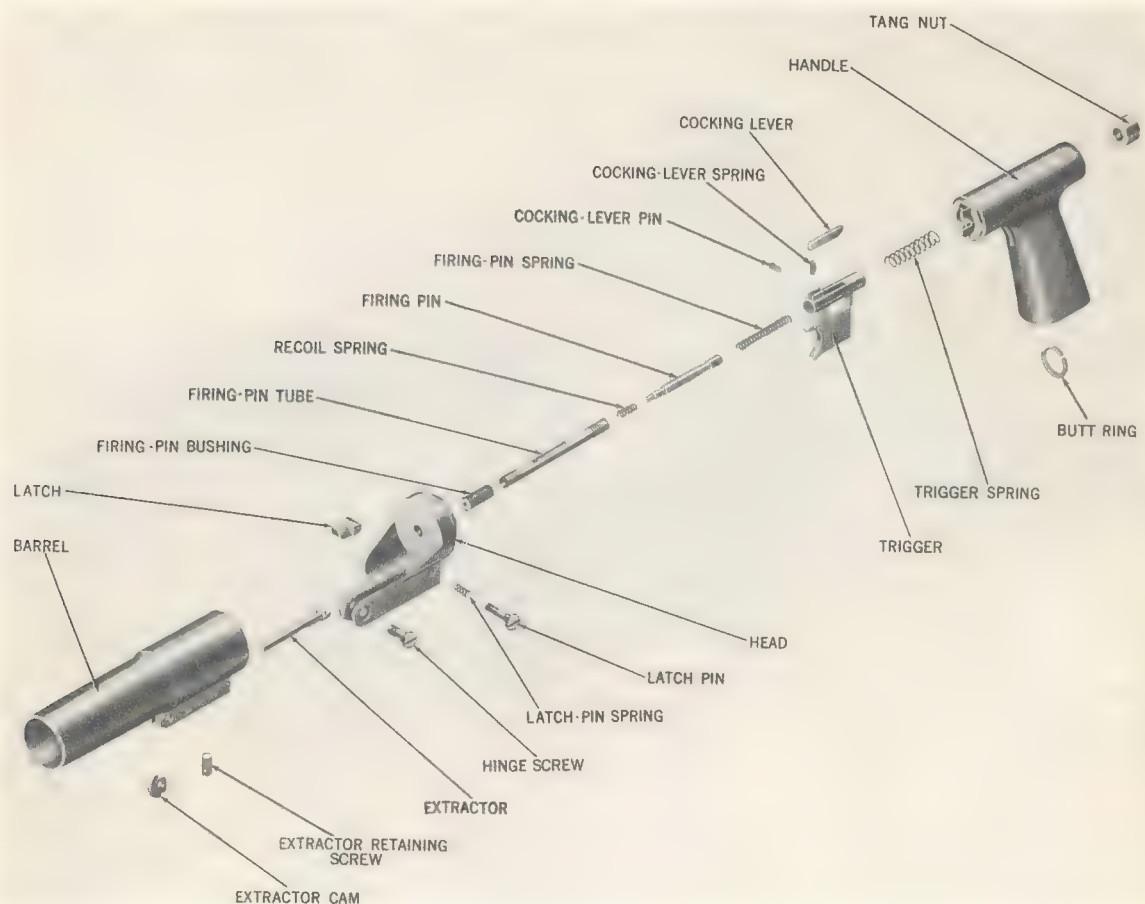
Rocket Signal Pistol Mk 1 Mod 0, Exploded View.
